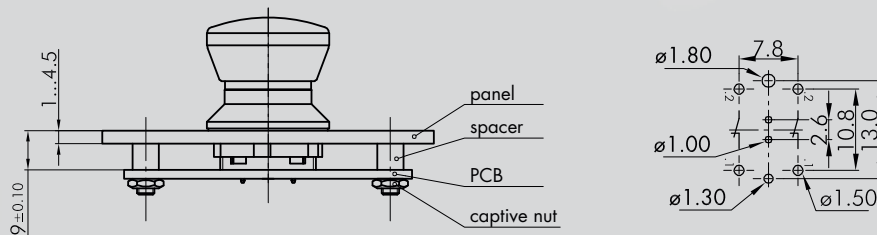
assembly drawing and hole pattern FRUV(L) with PT(L)OO
